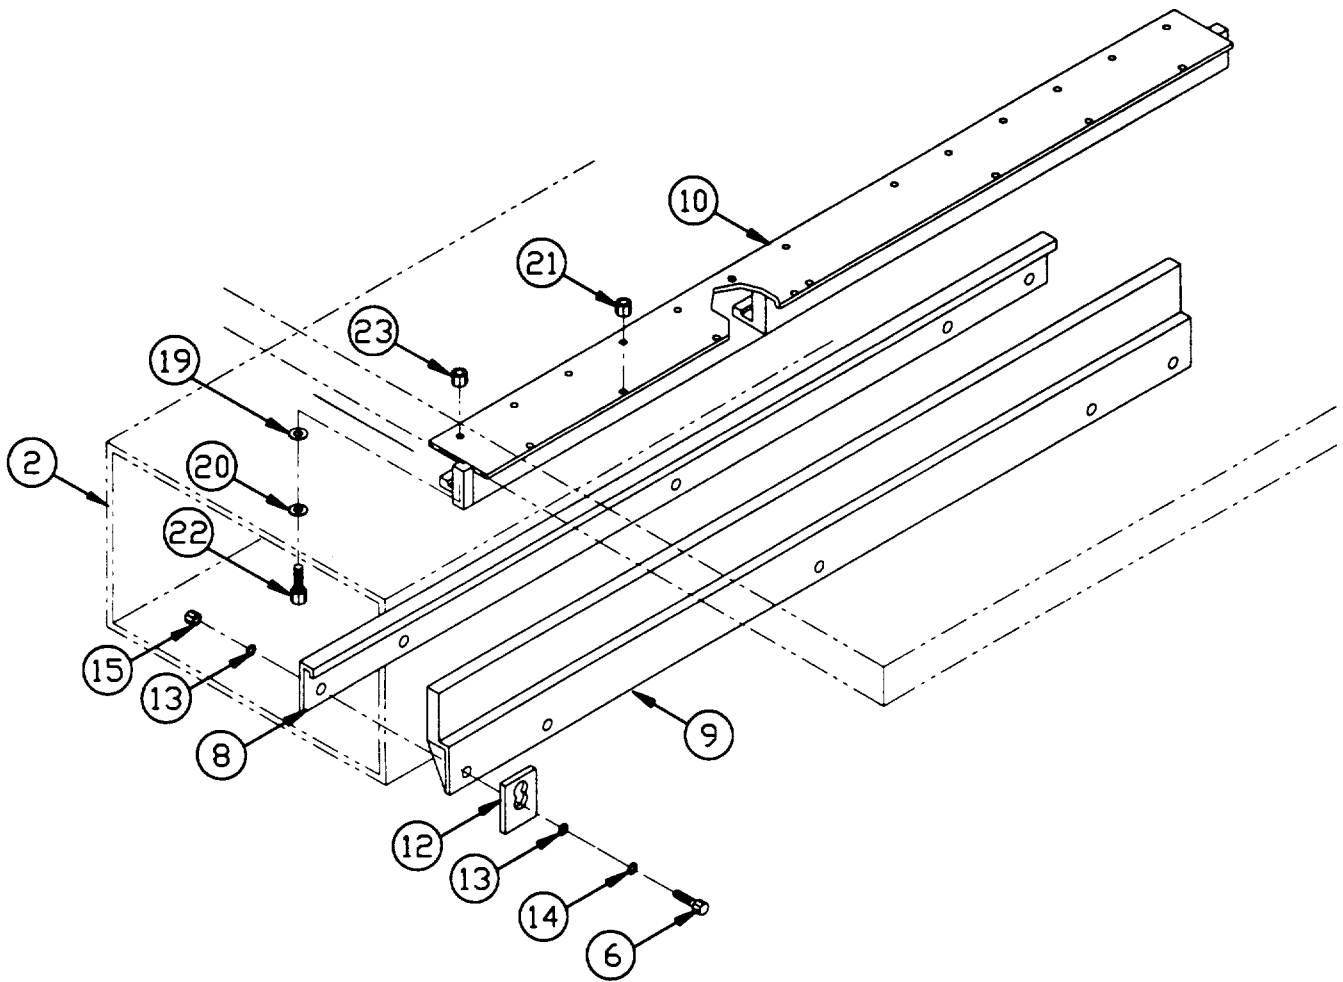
SHELTER AND MOUNTINGS (SHEET 1 OF 3)
